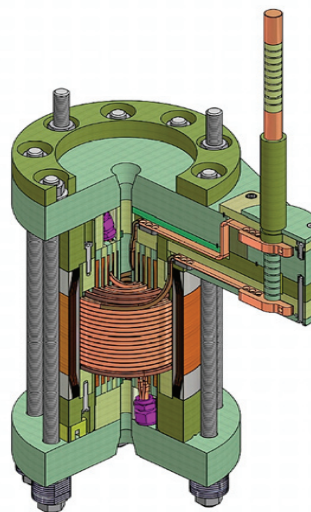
Sectional view of 75 T magnet illustrating winding structure, coaxial power feed, and improved “solid” flange structure. The solid flange structure was adopted in the 65 T production design to enhance the mechanical reliability of the assembly. The solid flange structure ensures the containment of axial loads in both normal operational and fault conditions.
